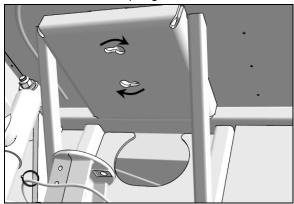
AIR SPRING UPPER MOUNTING PLATE
